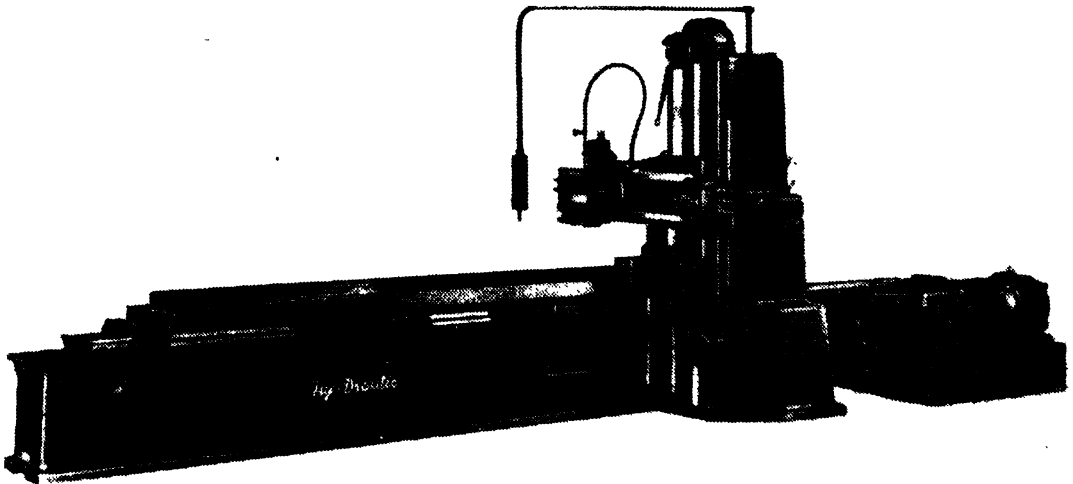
Hy-Draulic shaper-planer. (*The Rockford Machine Tool Co., Rockford, Ill.*)
